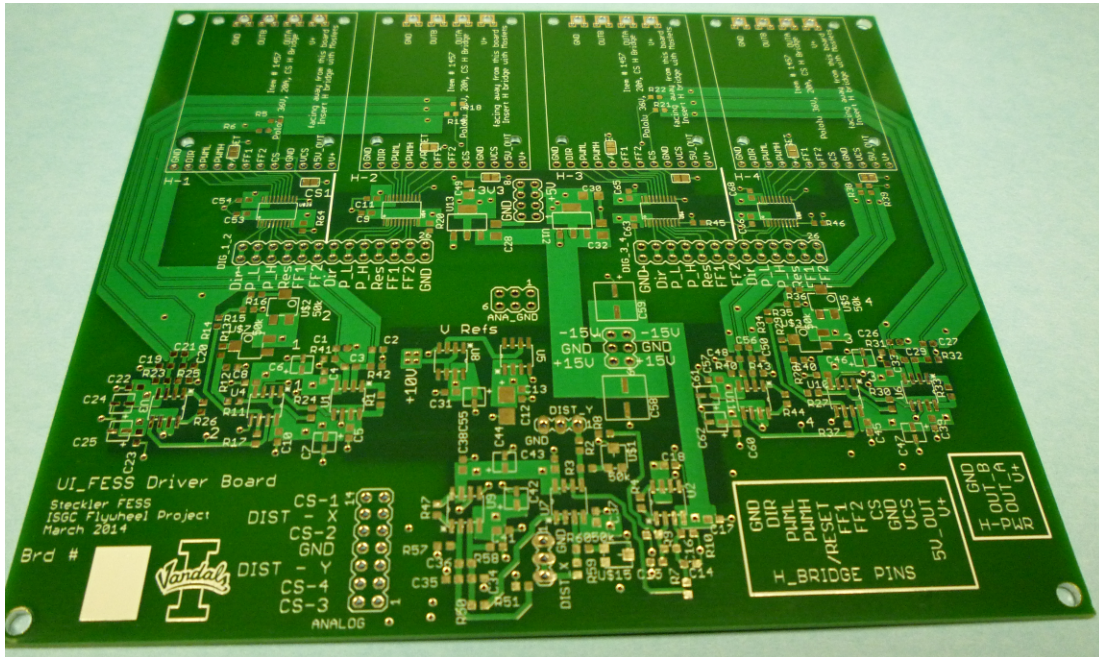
A Printed Circuit Board After Boardhouse Fabrication. The PCB is Blank Must be Populated with Components.
